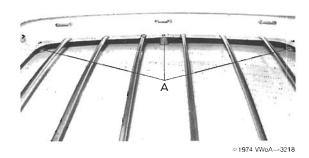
Phillips head screws with rubber spacers A that hold the rear of the luggage rack.
